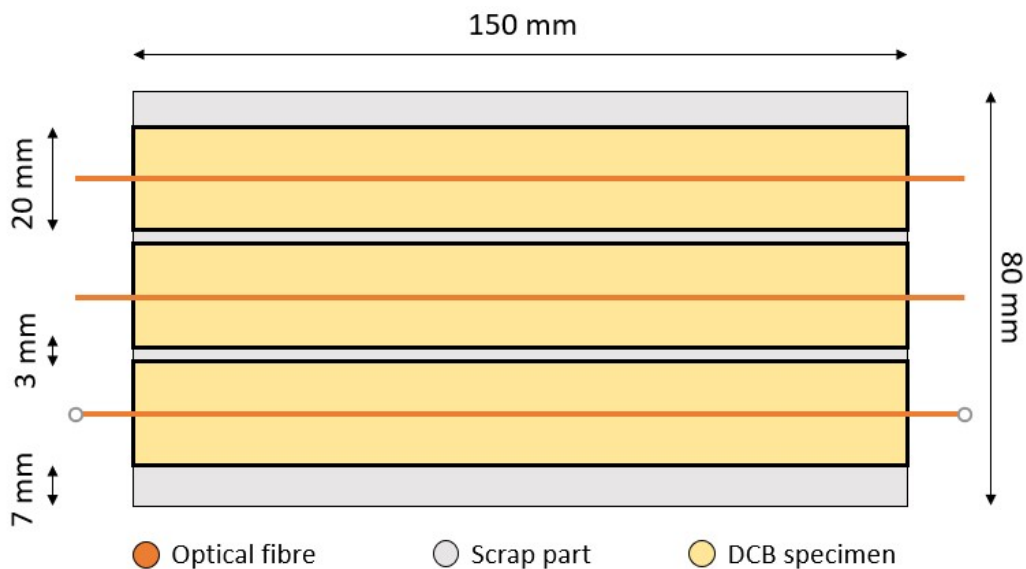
Technical sketch (top view) of the panel and the resulting DCB specimens.
